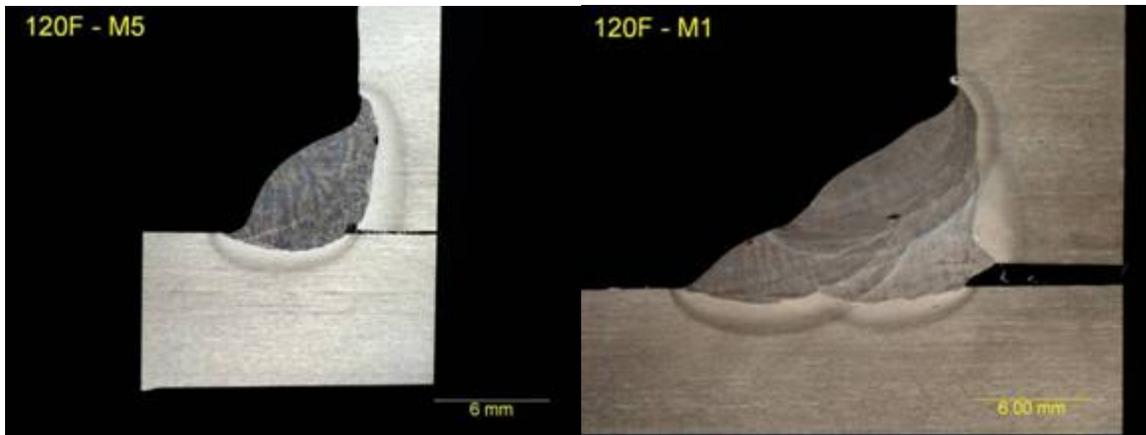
Macros of FCAW Welds on X120 Pipeline Material
